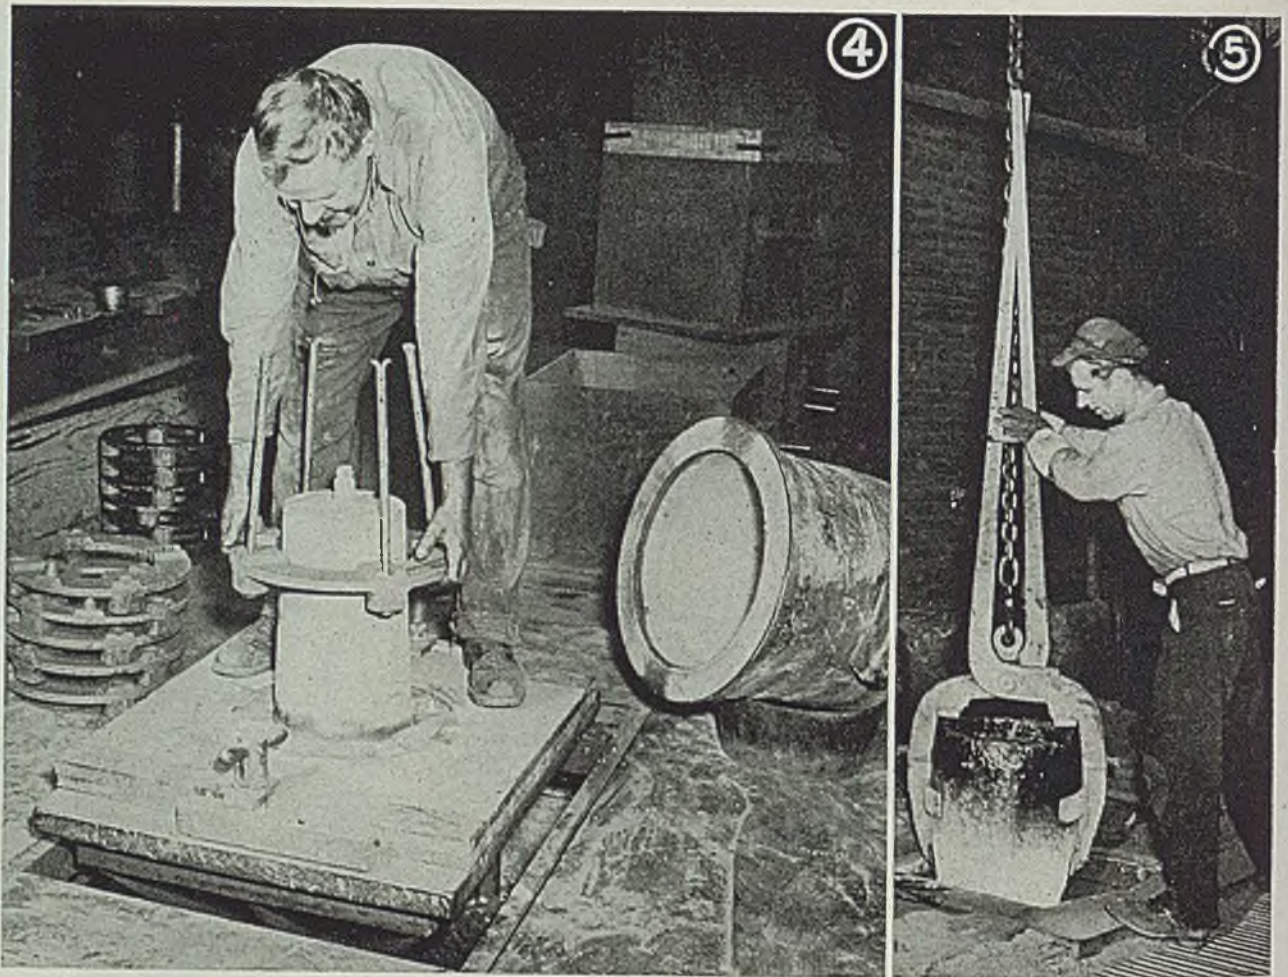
Lowering core drying plate with vent pipes over center plug on jarring machine, Outer part of core box at right; core drying plates at left
